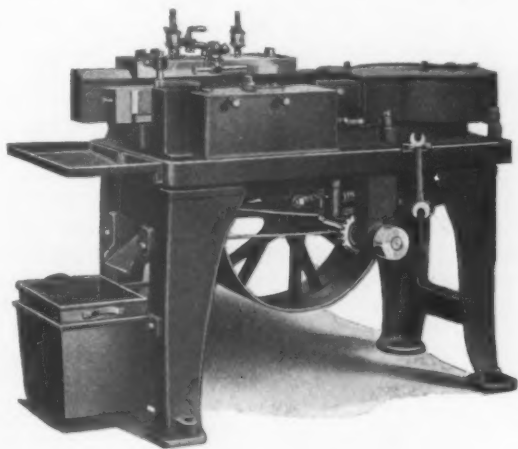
The No. 3 Hand-Feed Thread Roller Built by the E. J. Manville Machine Company, Waterbury, Conn.
